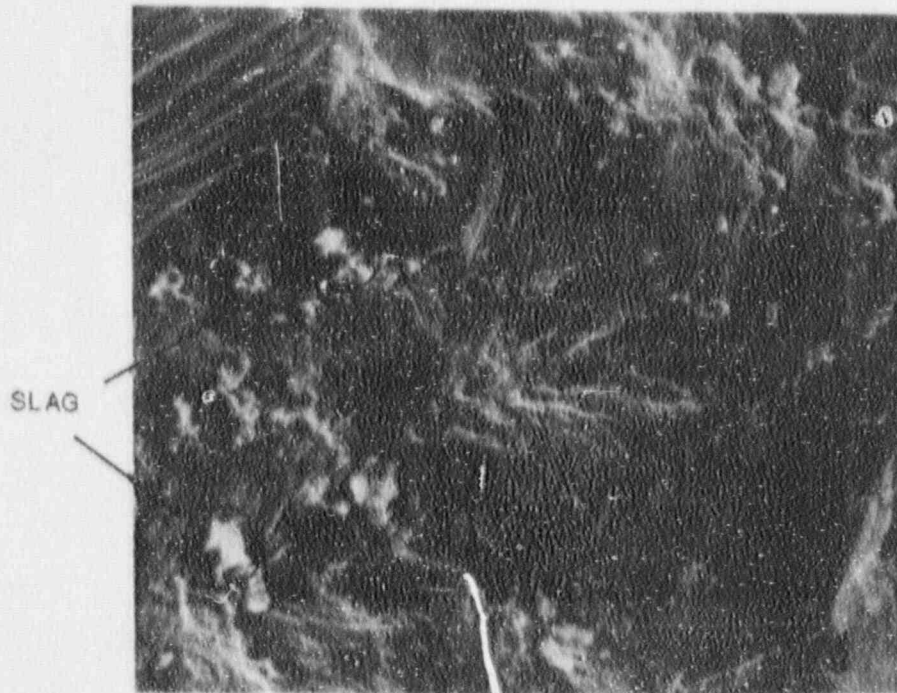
Failed Weld Showing Slag Inclusions (Marked in Circles)
